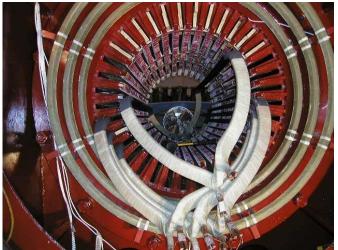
shows installation of the some of the first stator coils in a paper mill generator rewind.
